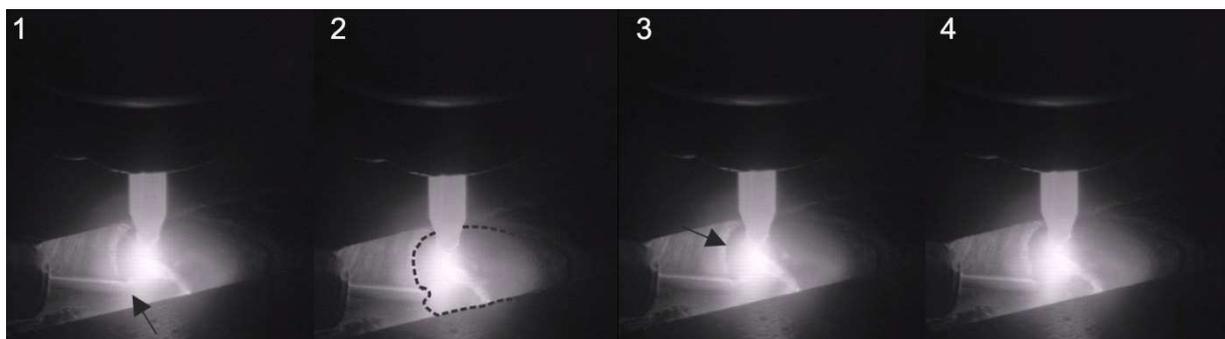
Welding process tracking in GTAW Thermic Pulsed (*First pass*).
